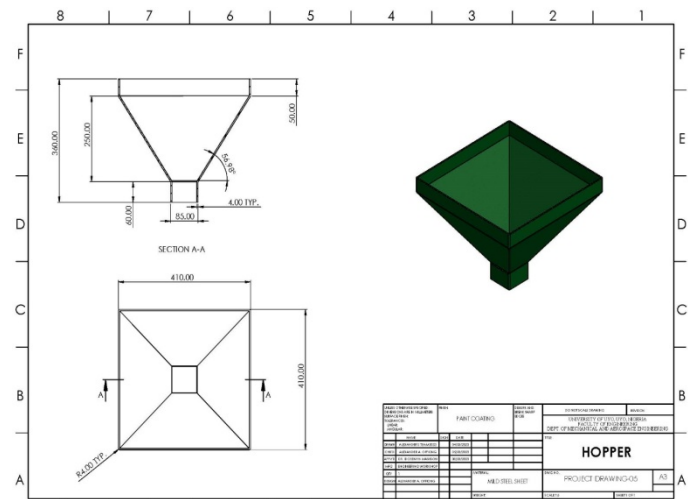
Components drawing the palm kernel nut cracking machine [Hopper]
